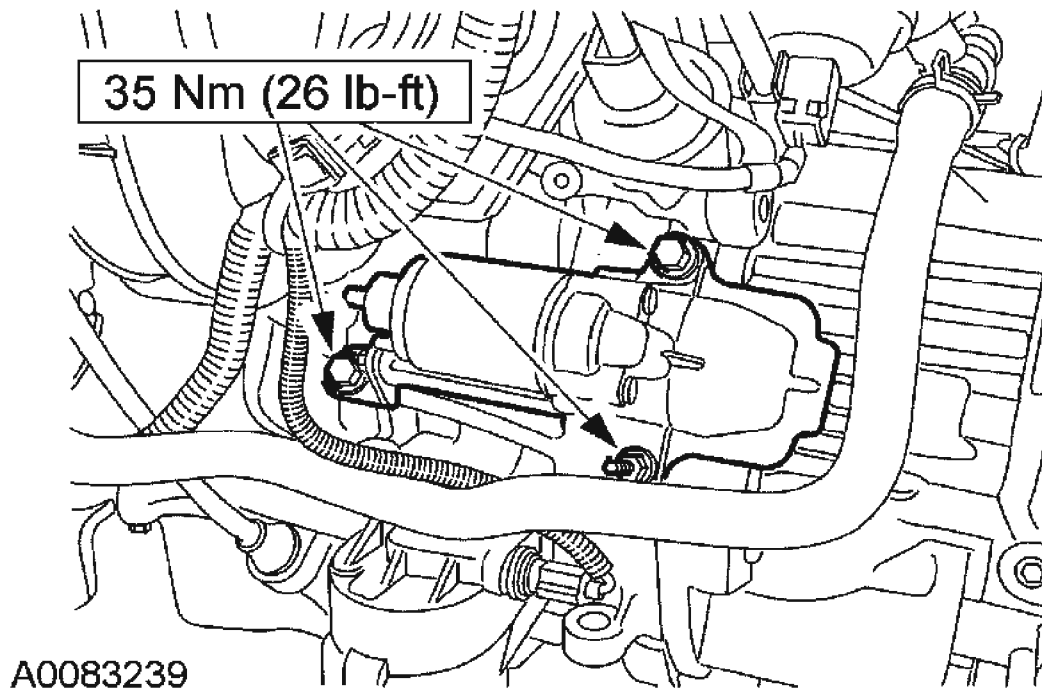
Installing Starter Motor And Inserting Three Bolts
